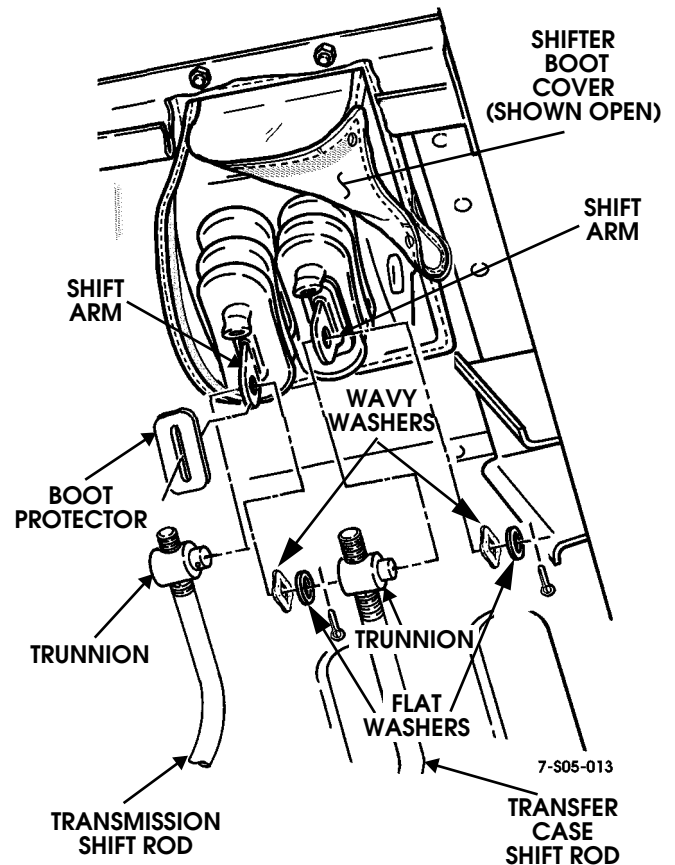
Shift Rod Connection (Illustration Shown with Shifter Boot Cover Opened)
